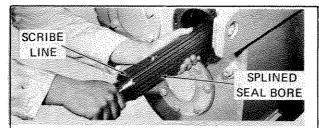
Installation of Brake Shaft Assembly (Sheet 2 of 2)
